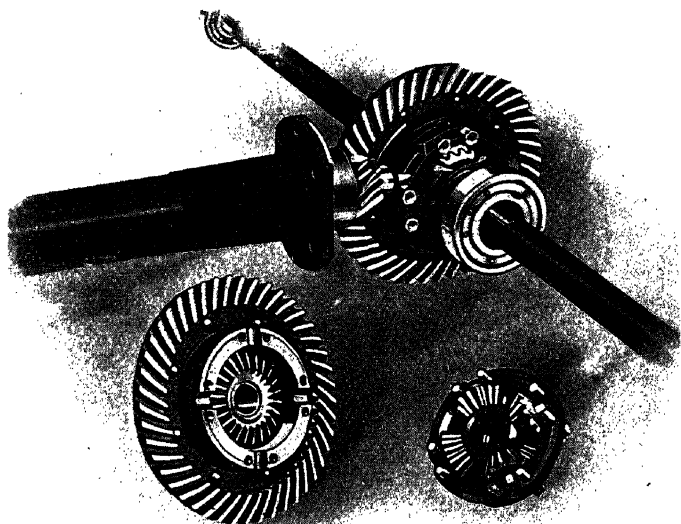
Helical Bevel Car Final Drive, showing Differential Gear and Back Axles.
